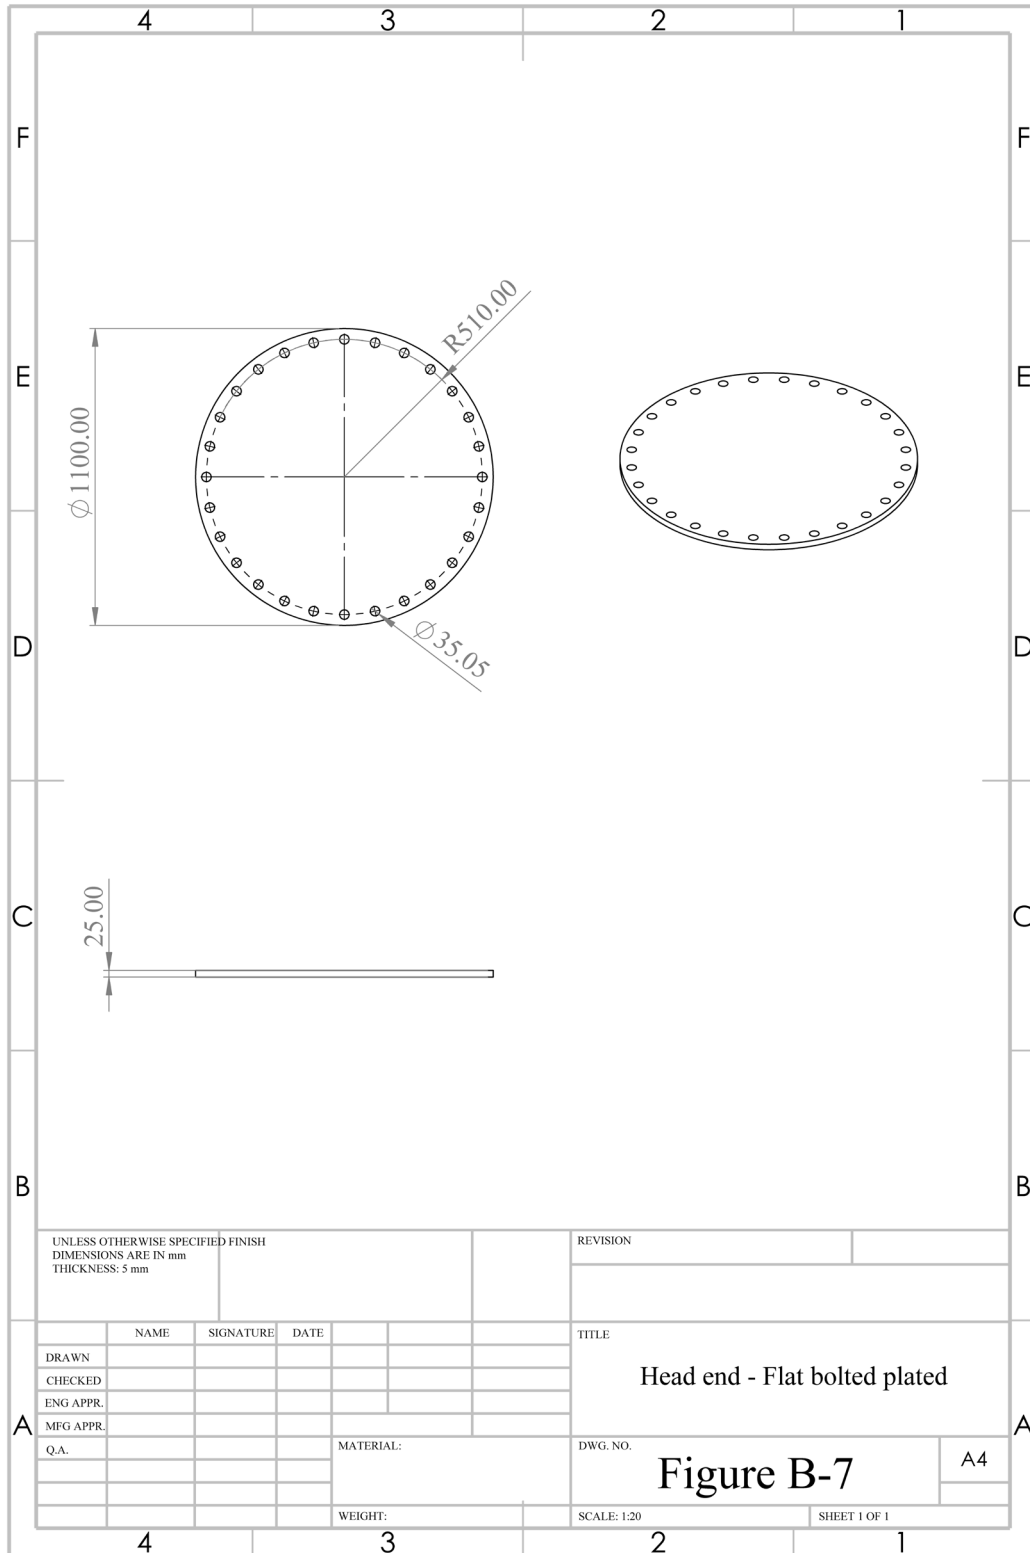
Design drawing of the head flat bolted end. Source: Figure created by author.
